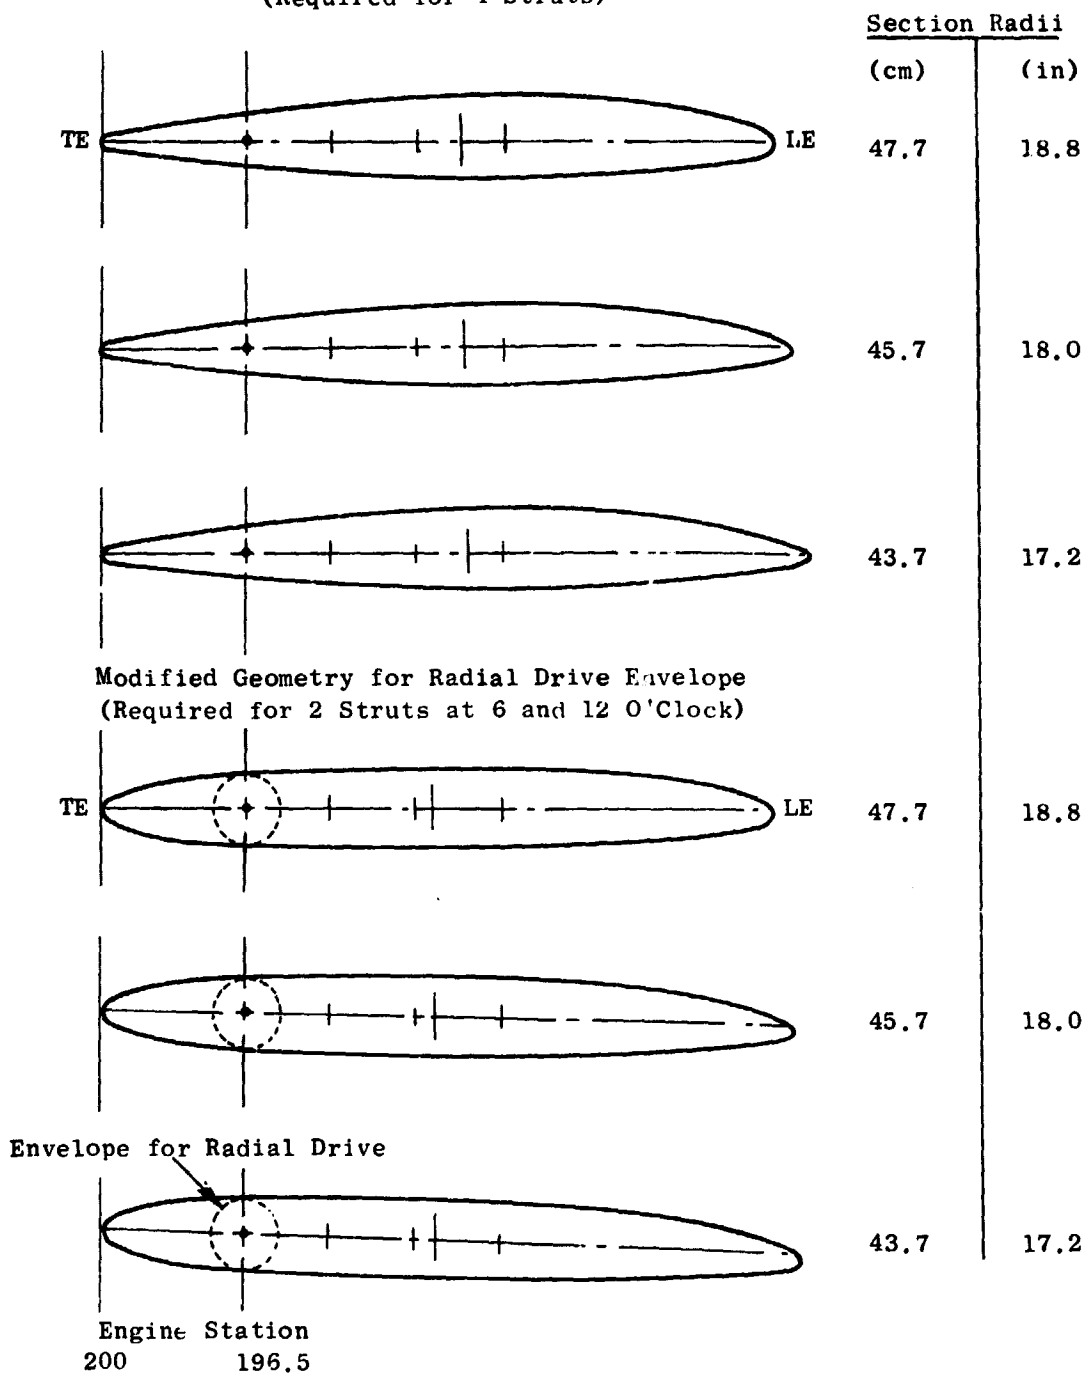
Transition Duct Strut Cylindrical Sections at Three Radii.
